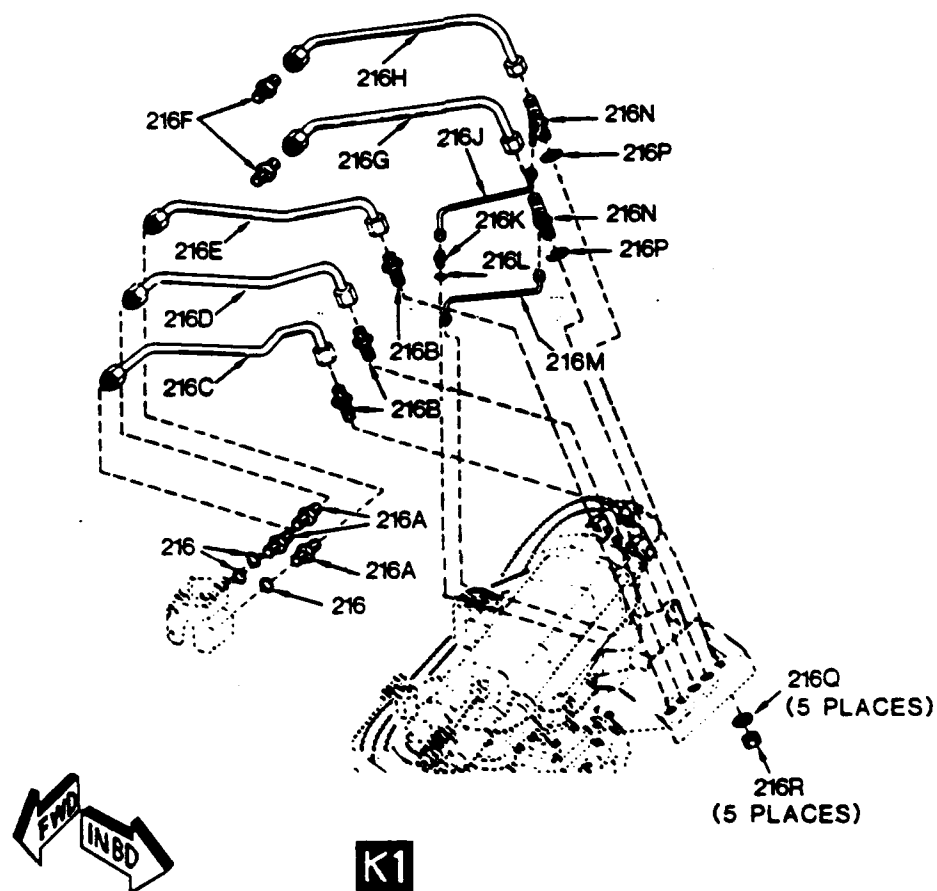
RH Aft Strut Assembly (Sheet 8 of 18)
